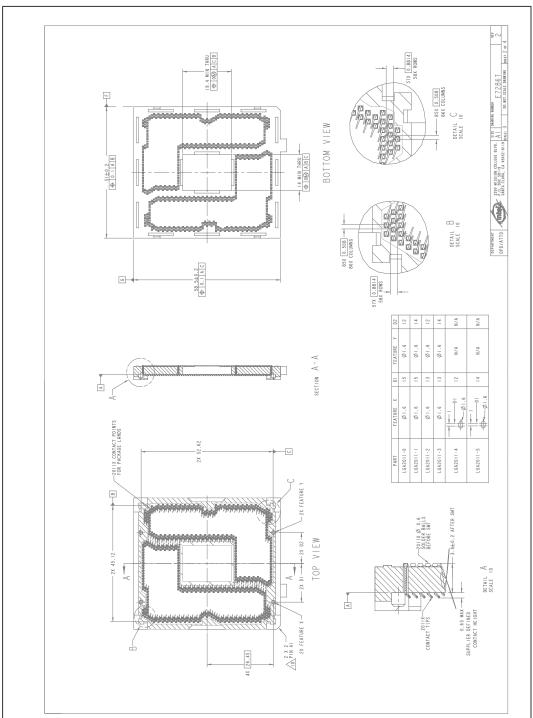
Socket Mechanical Drawing (Sheet 2 of 4)
